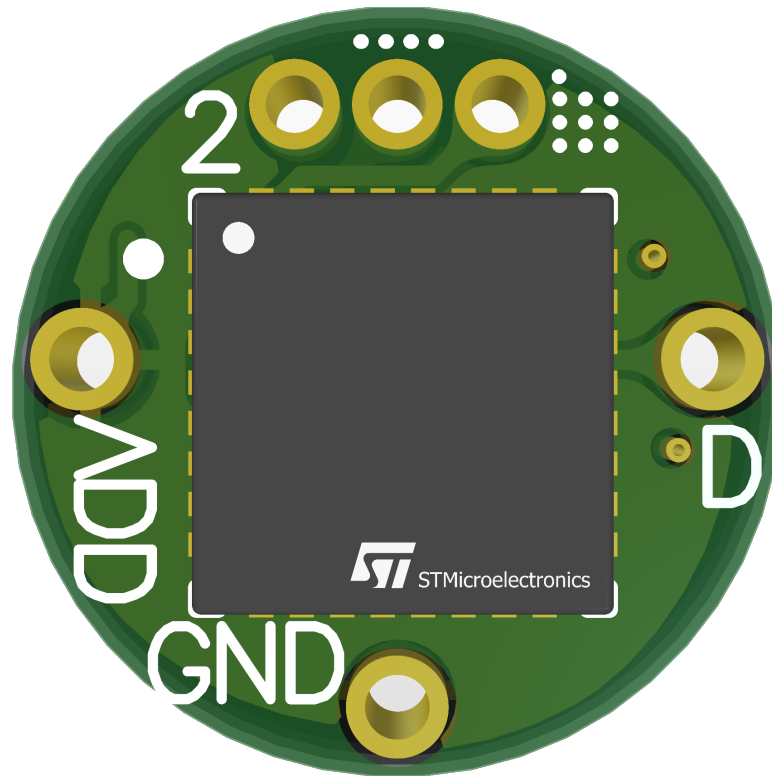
The STM32L432KBU6 MCU, we initially wanted to use, placed on the bottom of PCB2. The vias for VDD and GND, used for programming had to be removed to fit the MCU.
